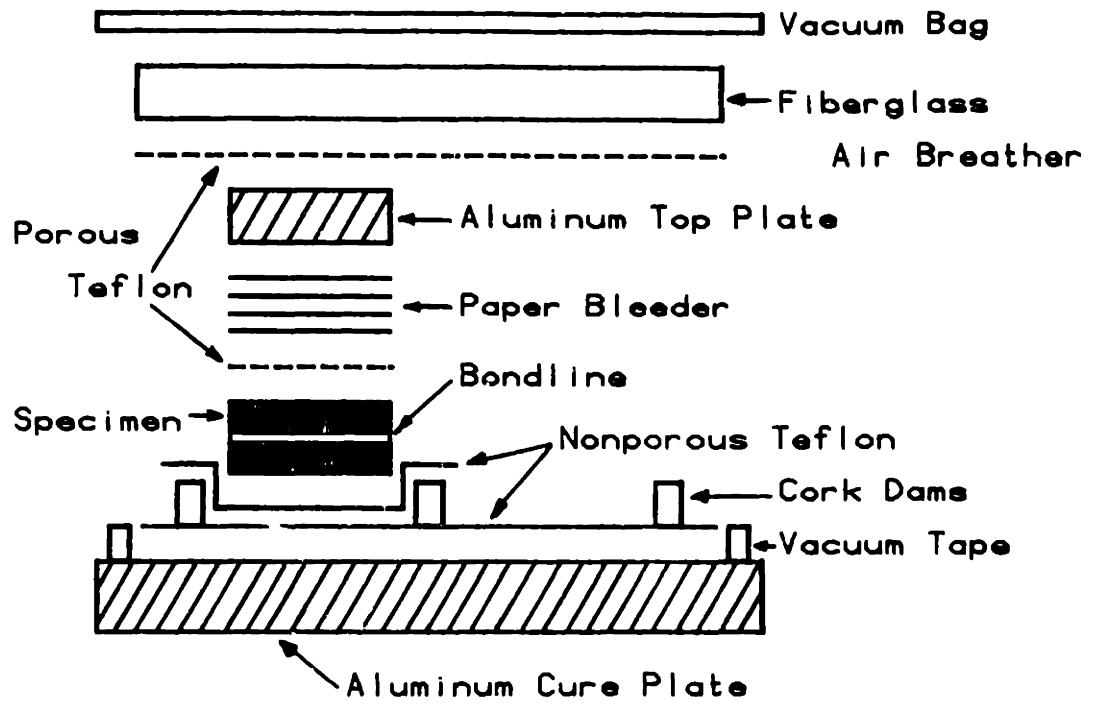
Schematic of Bonding Assembly Cross-Section
